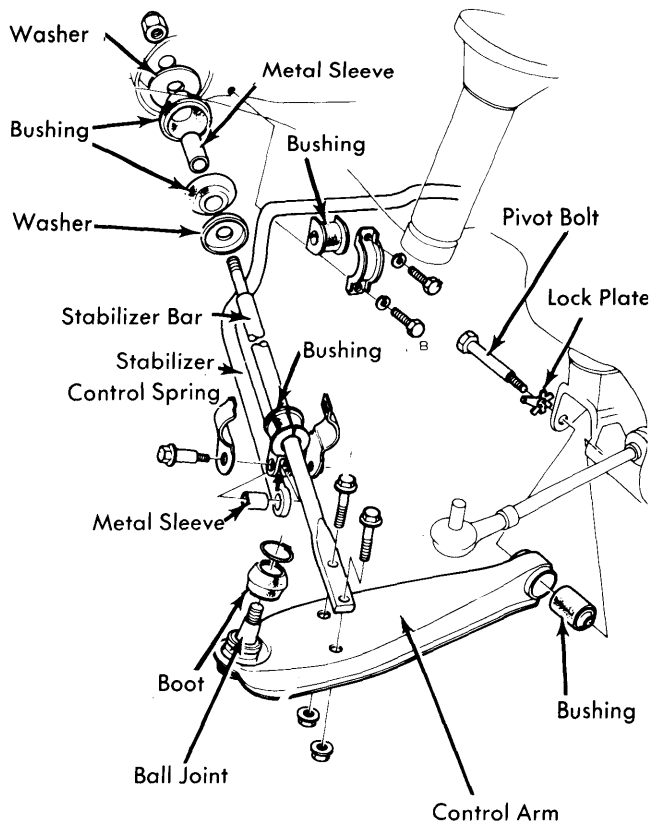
Exploded View of Stabilizer Bar and Control Spring
